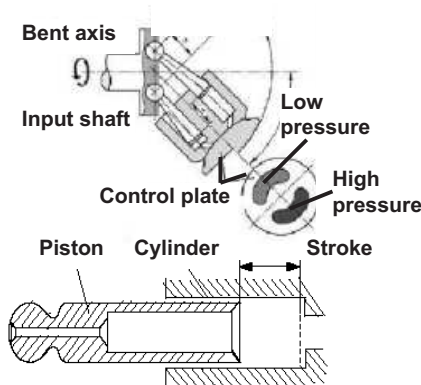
Principle of an axial piston pump of bent-axis design [19.81].
